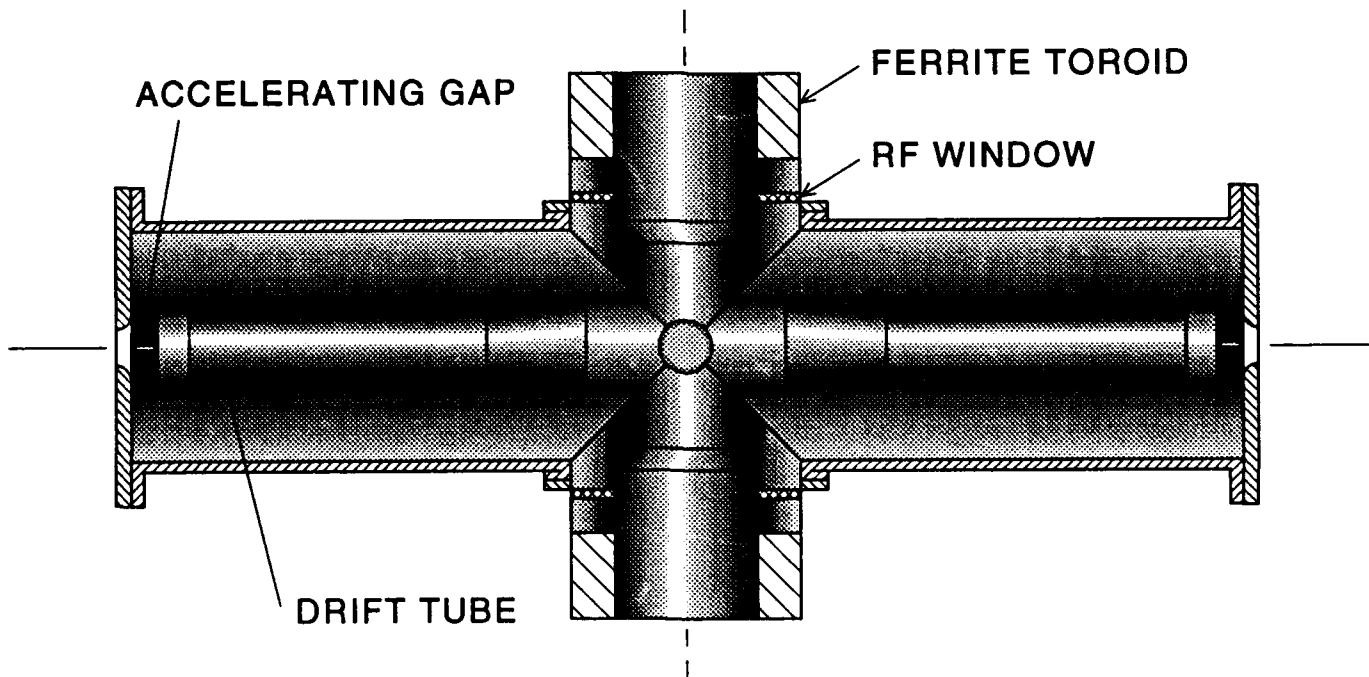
A partial horizontal cross section view of the cavity. The cavity consists of a long drift tube inside of a cylindrical tank with accelerating gaps at each end. The drift tube is supported by two coaxial ferrite tuners, as a cannon is supported by its trunnions. Not shown in this view is the power tube which sits vertically above the center of the drift tube and is capacitively coupled to it.
